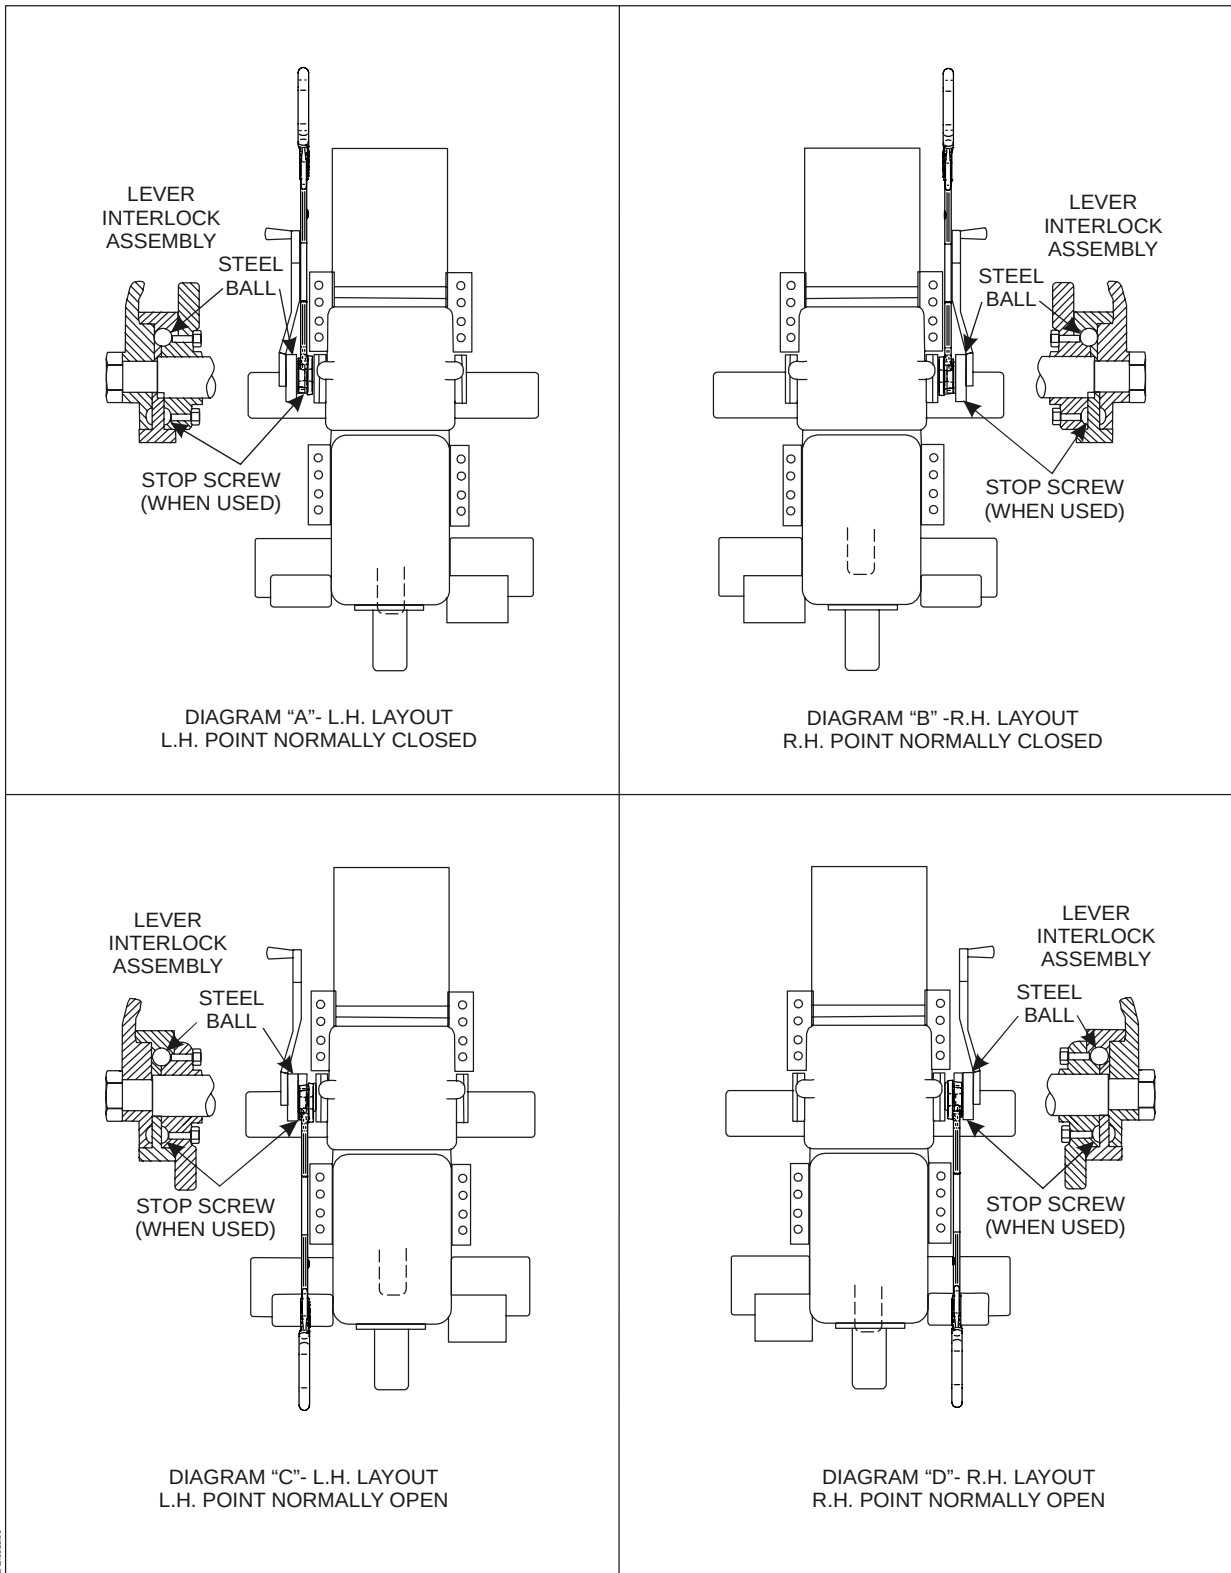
Standard Lever Interlock Assemblies (M-23)
